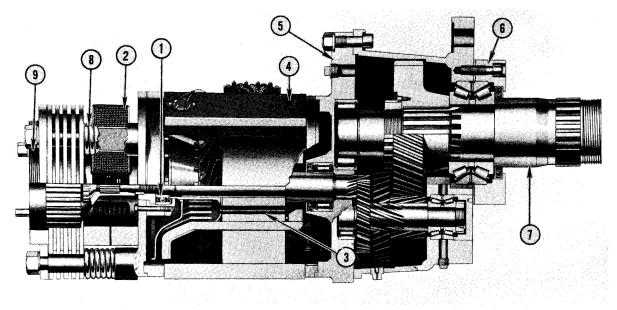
A.C. ELECTRIC MOTOR AND GEAR BOX
